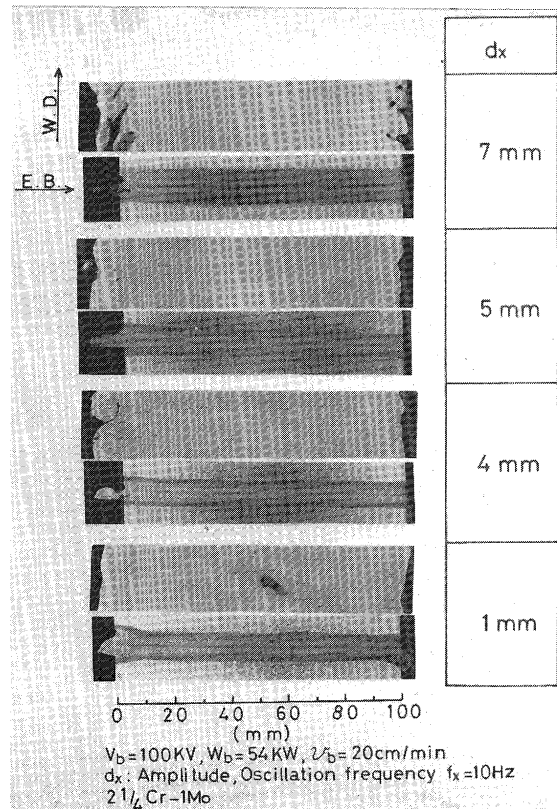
Fully penetrated bead section of horizontal position welding with various beam amplitude.
